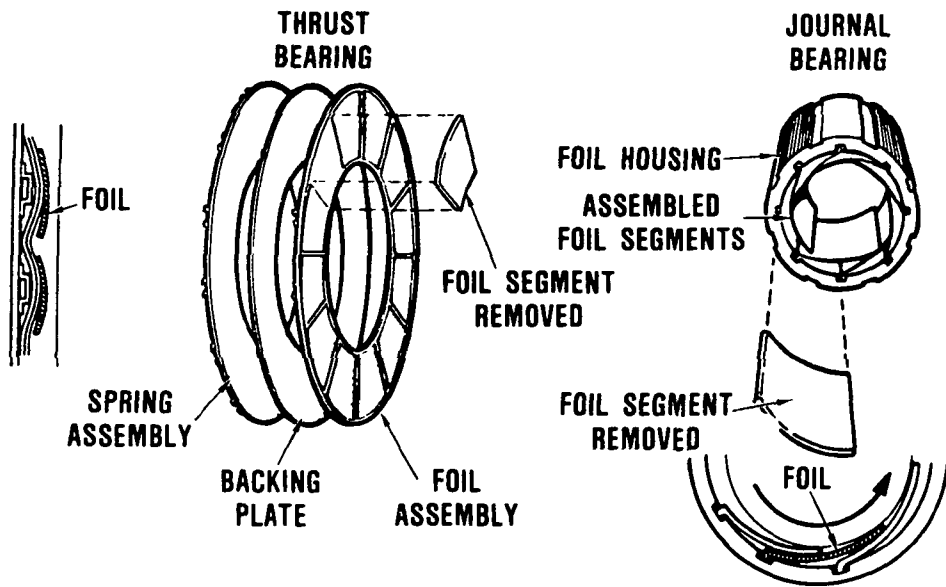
Details of Typical Gas Lubricated Foil Bearing.
